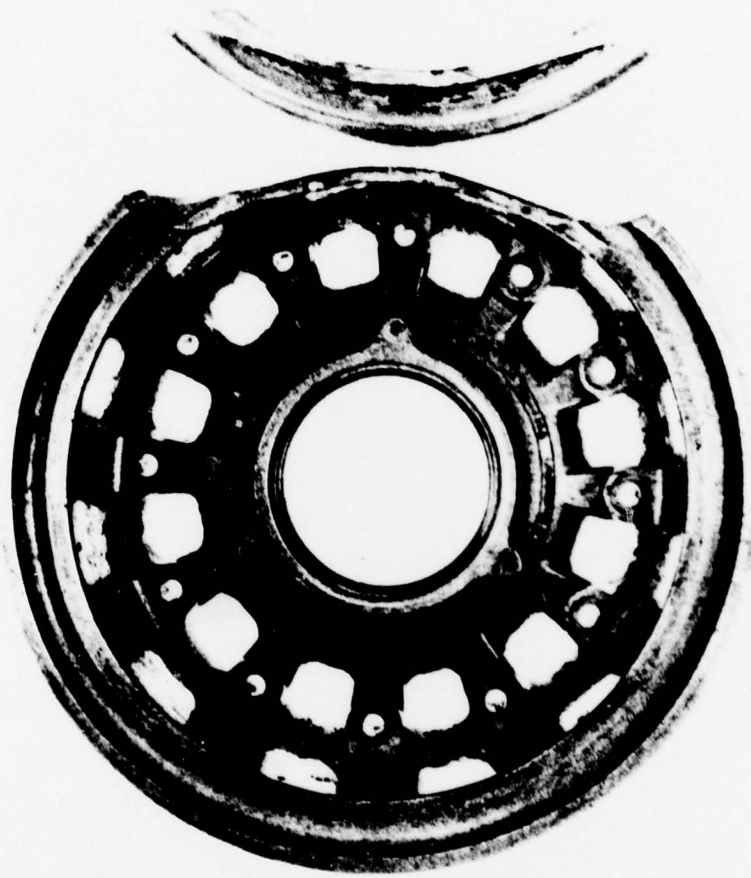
GENERAL VIEW OF LANDING WHEEL FAILURE
